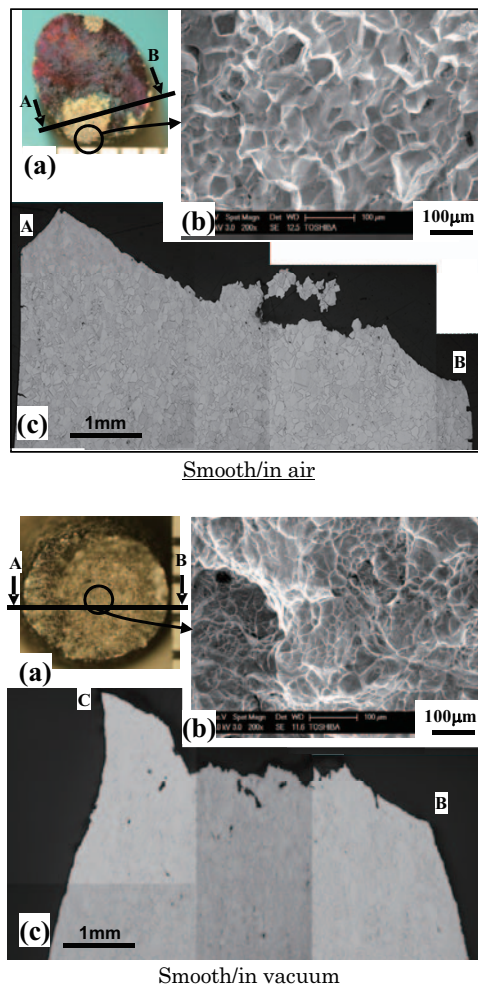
The fracture appearance of the smooth specimen fatigue-tested in air and vacuum at 600°C / 0-750 MPa/10min. (a) Viewpoints of fracture surfaces, (b) Crack initiation sites (by SEM), (c) Cross-sectional microstructures (A-B section)
